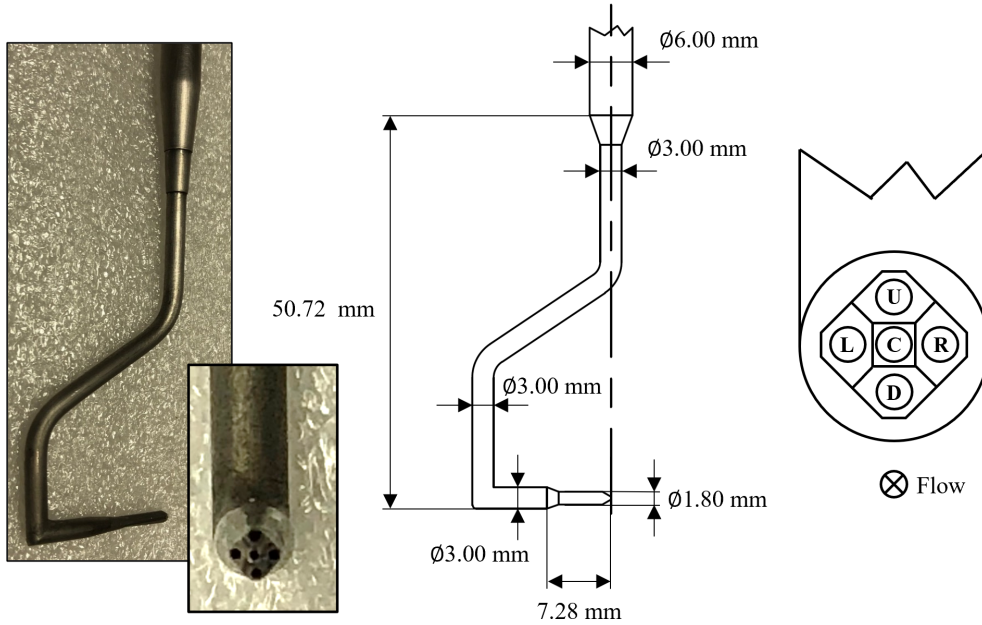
Cobra-shaped five-hole probe geometry and dimensions.
